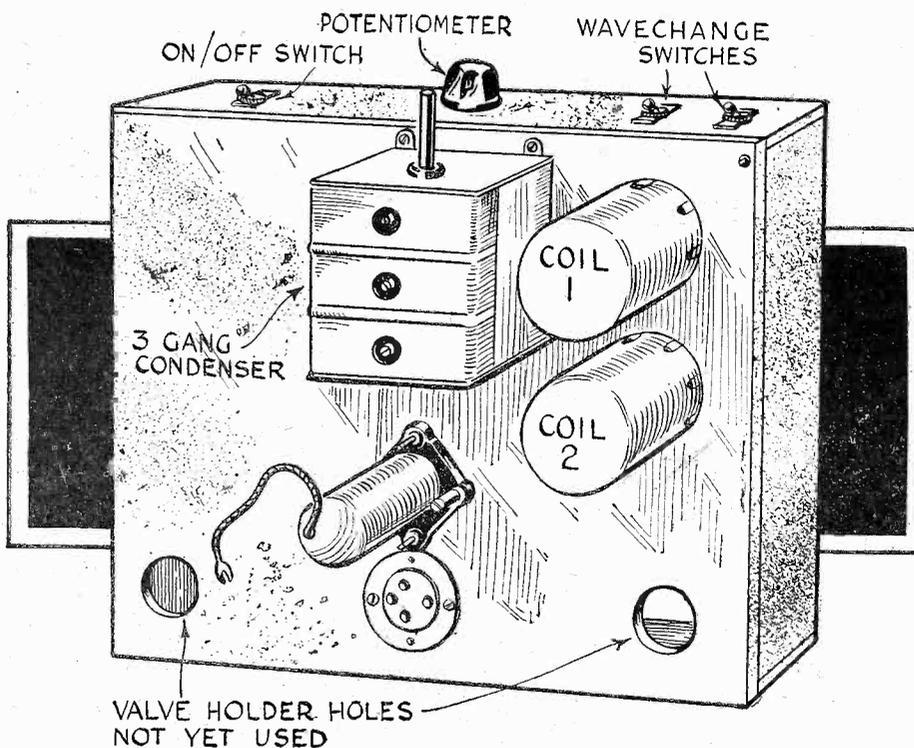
This illustration shows the disposition on the chassis of the principal components. Those not shown, such as the "Westector" and tubular condenser, may be placed below the chassis and supported by the wiring.
